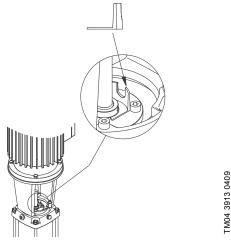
Coupling adjustment CR, CRN 32, 45, 64, 90, 120, and 150
